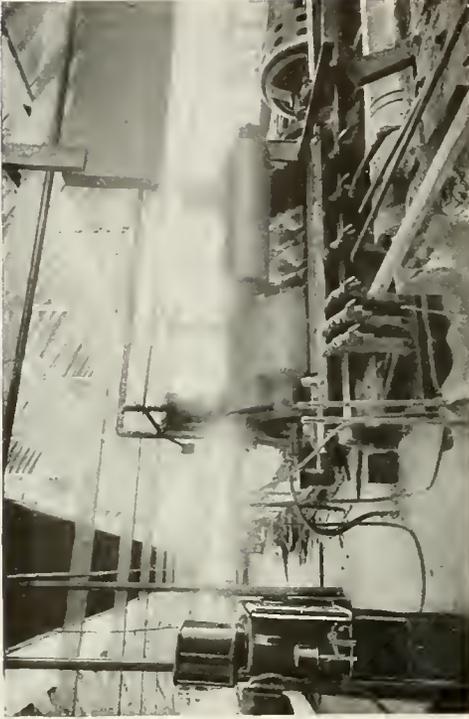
200-h.p., 1200-r.p.m., 220-volt, Form K Motor Direct Driving 12-ft. by 72-in. Edger in Lumber Mill
